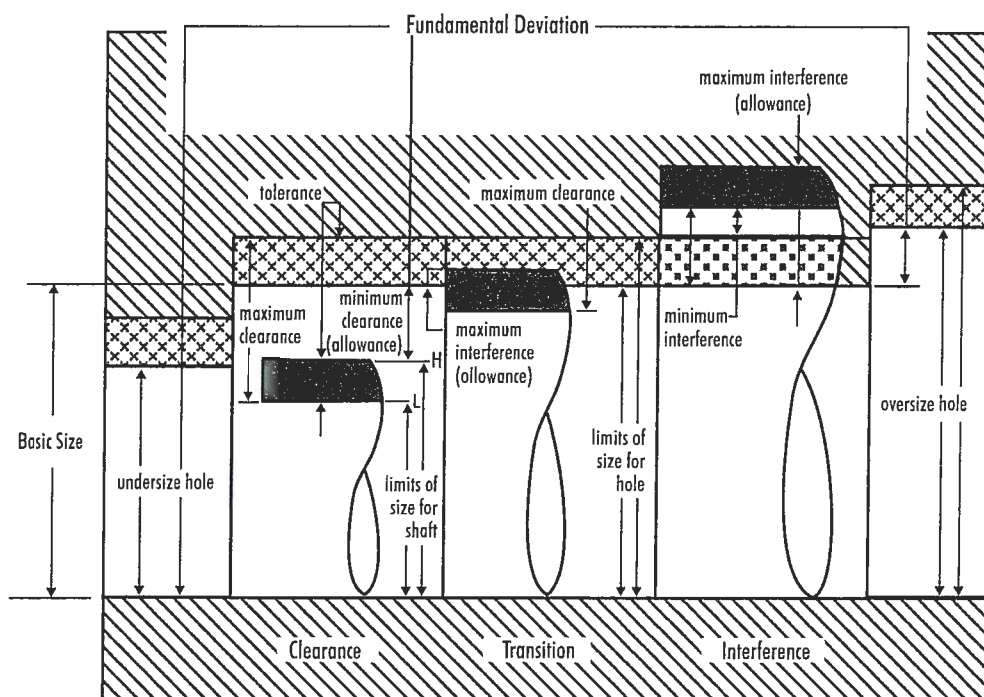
Disposition of limits and tolerances (Basic hole).
